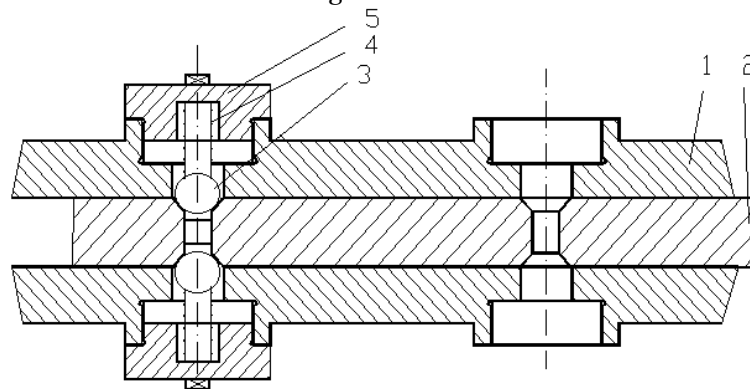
Protection device with spherical elements. 1 - rod sheath; 2 - sword rod; 3 - spherical locking element (ball); 4 - compression spring; 5 - screw cap
